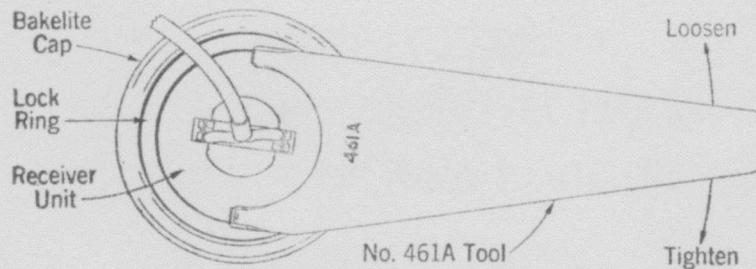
Assembly of Receiver Unit, Bakelite Cap and Lock Ring.
